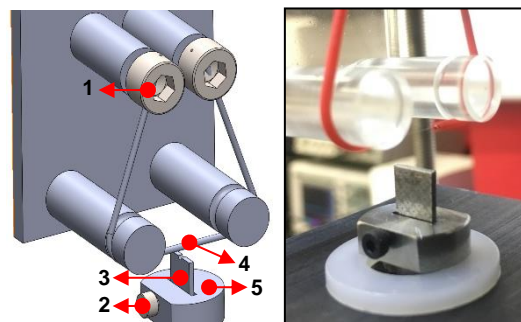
New tool configuration (1 - Tighteners; 2 - Specimen holding; 3 - Specimen; 4 - Wire (tool); 5 - Specimen housing).
